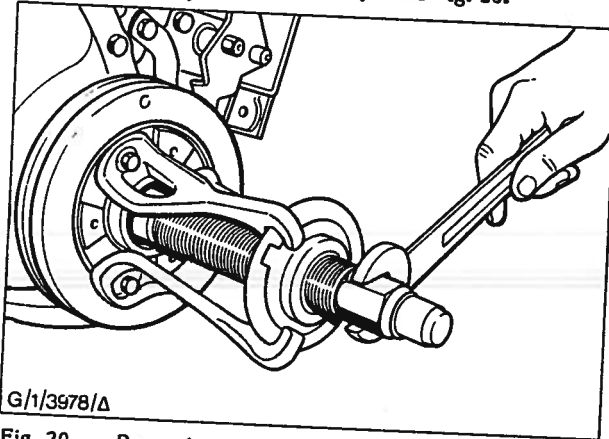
Removing Crankshaft Pulley - All Engines Except 2728T
